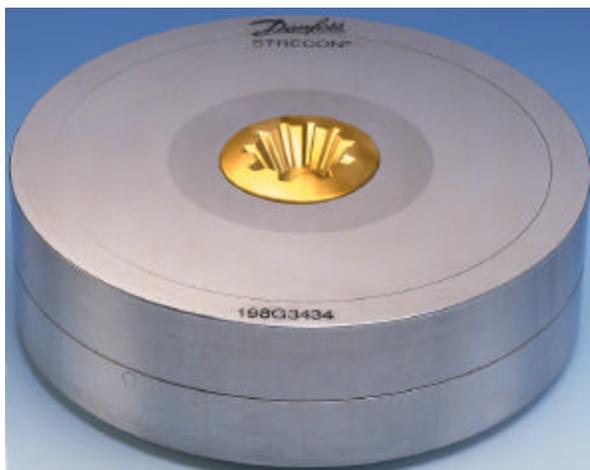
STRECON<sup>®</sup> E<sup>+</sup> tool for manufacture of bevel gear
